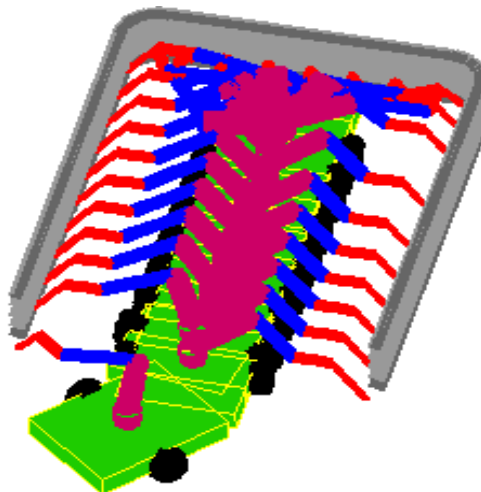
Three-link welding manipulator mounted on mobile platform
